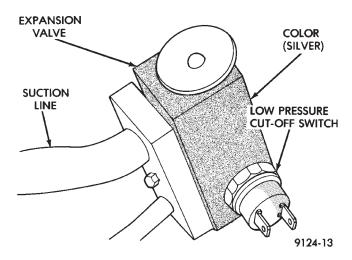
Low Pressure Cut-Off Switch and Expansion Valve—Typical
